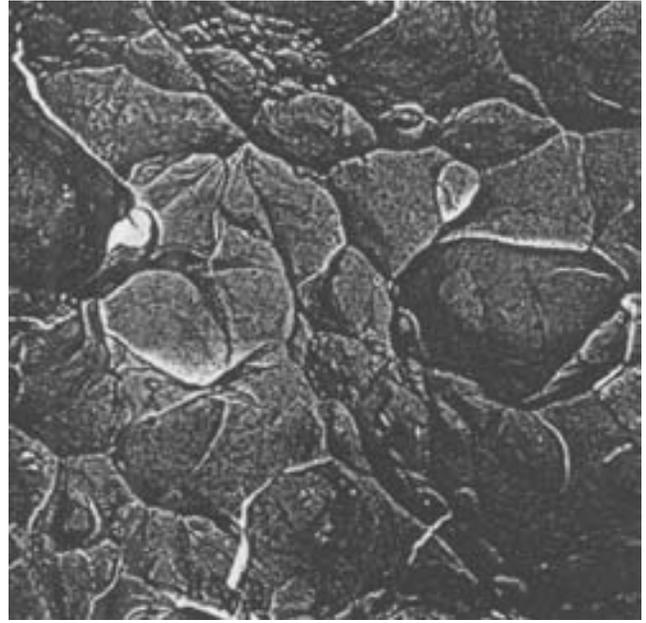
Electron micrograph of fracture surface of gas metal-arc weld in 18Ni (250) showing dimpled facets with inclusions. Compare to gas tungsten-arc weld in Fig. 38. X7500 (Reduced 55%)
